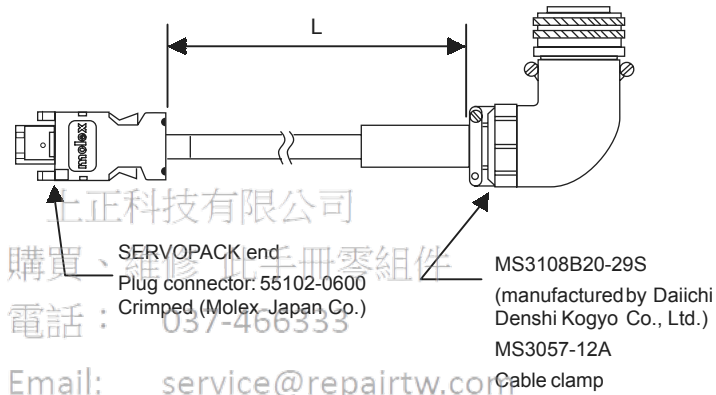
SGMBH Servomotor Cables With L-shaped Plugs
